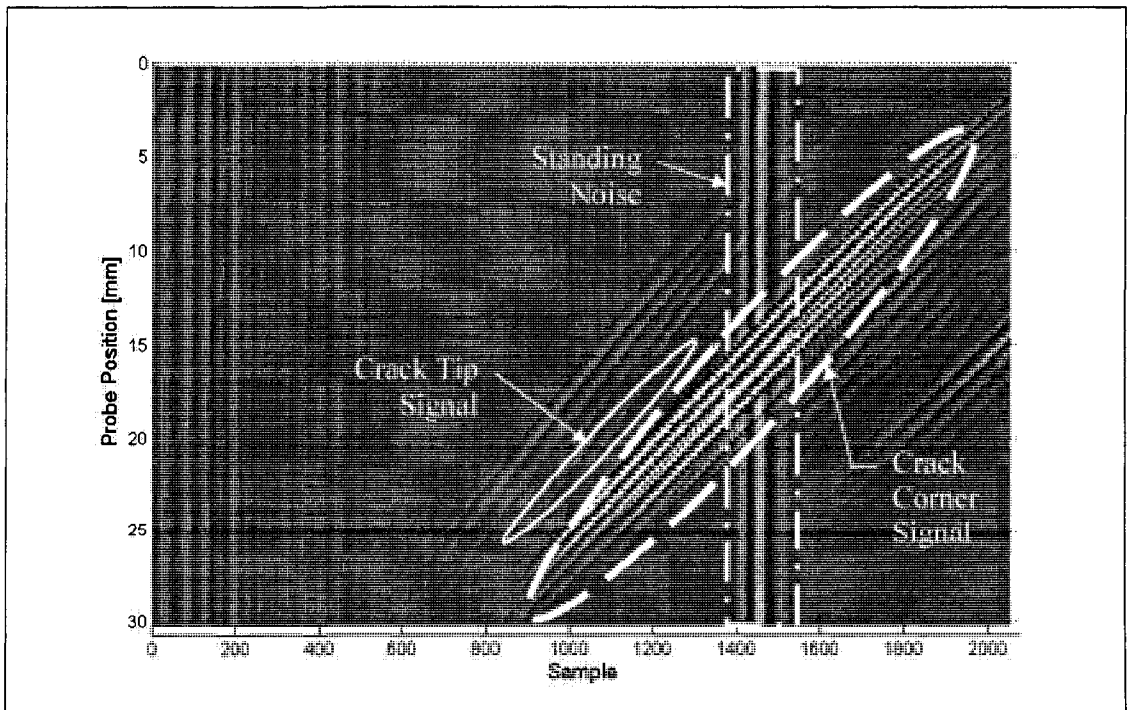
B-scans of specimen CO1 at 25% crack opening load
